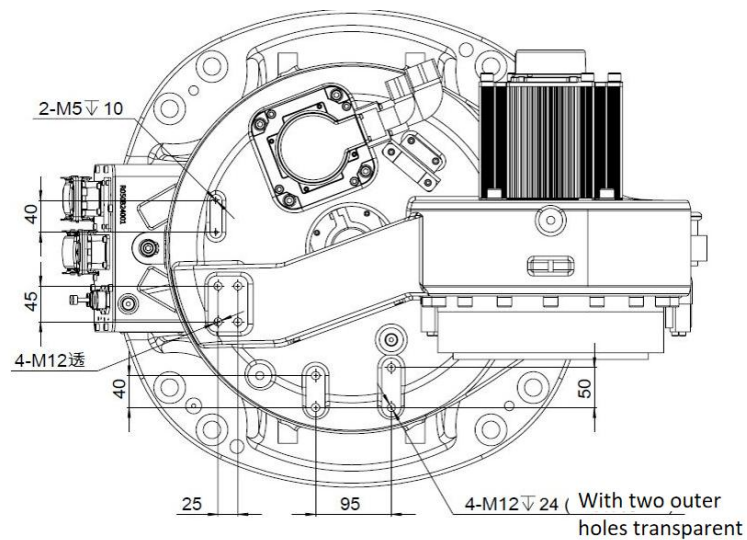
Shoulder Interface Dimensions of RX3-A650-2260/RX3-A680-2260/RX3-A635-2700/RX3-A620-3100
